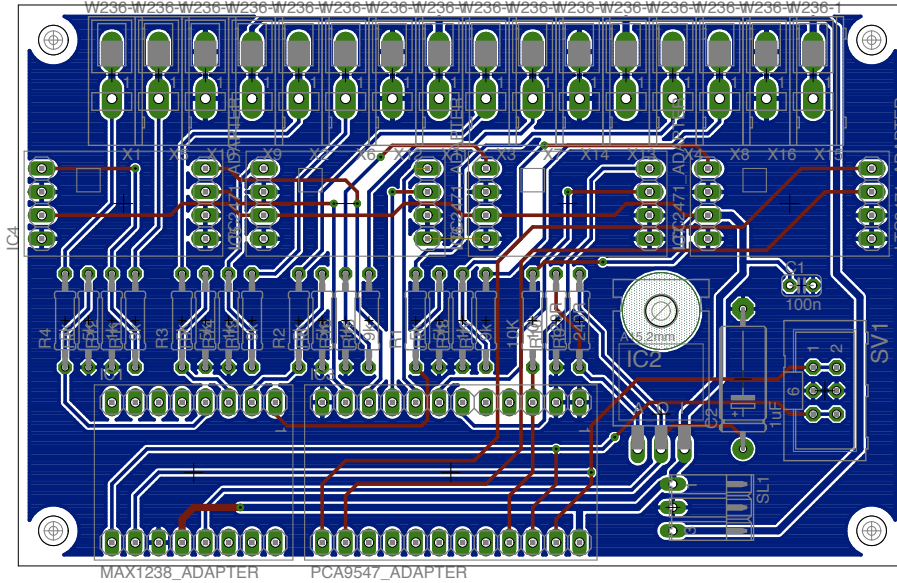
PCB layout of the ADC module for hydrostatic pressure sensors. The two-sided layout has a size of $97 \text{ mm} \times 61 \text{ mm}$ and has drill holes matching the layout of the CAN to I²C converter to allow stacking with 20 mm straight connectors.
